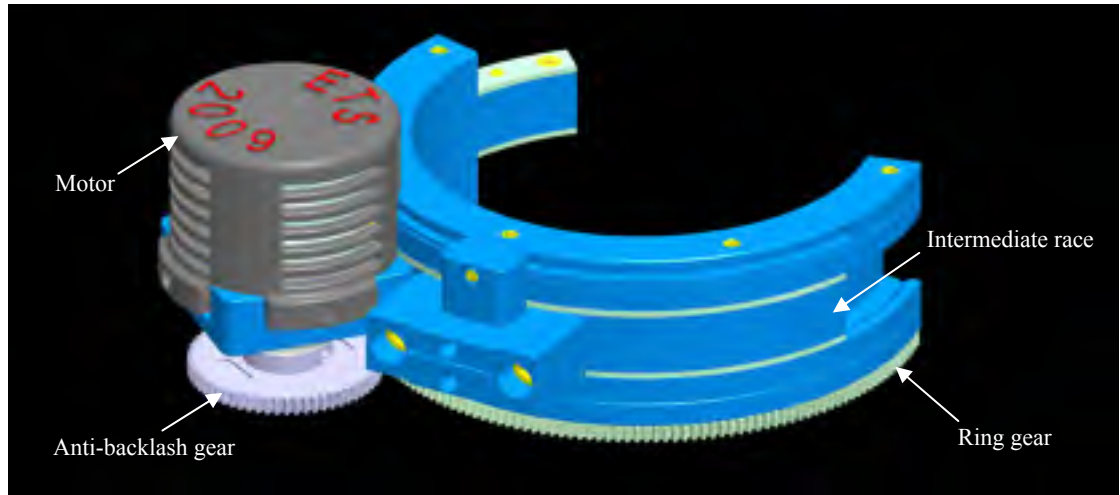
Actuation mechanism with an open type bearing and a ring gear
